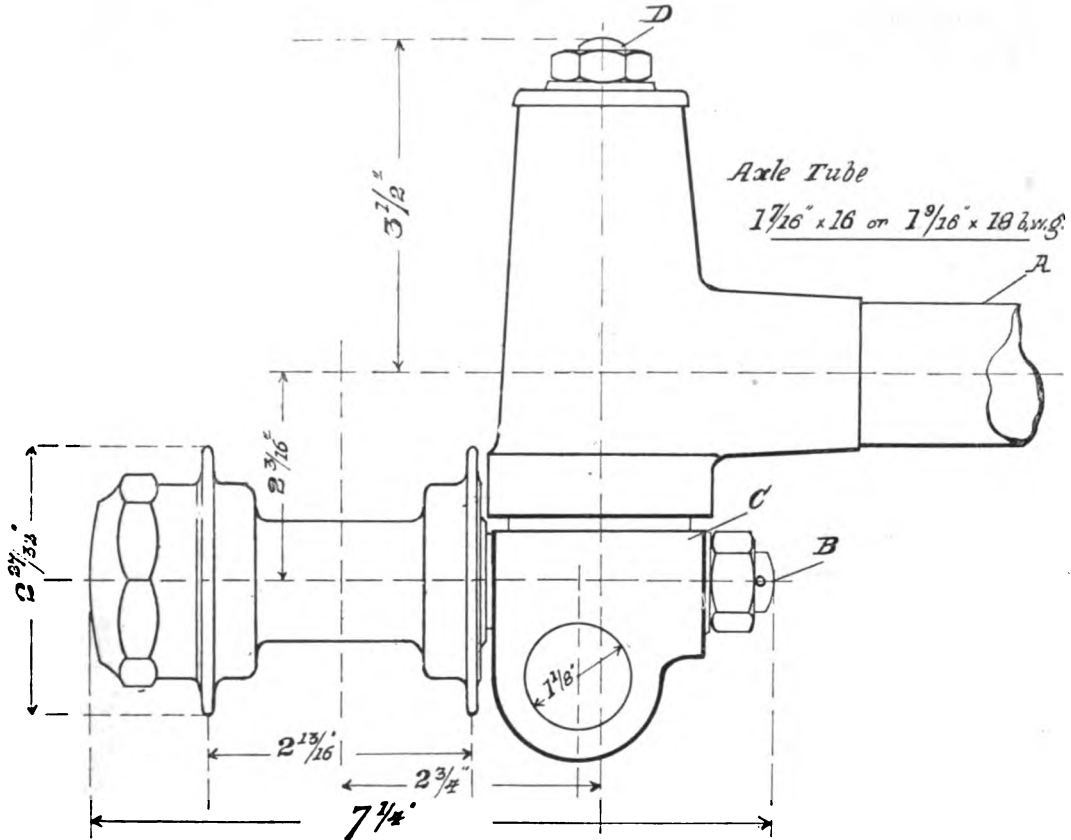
HUB AND STEERING SOCKET FOR FRONT AXLE OF QUADRICYCLE (Half Size).
